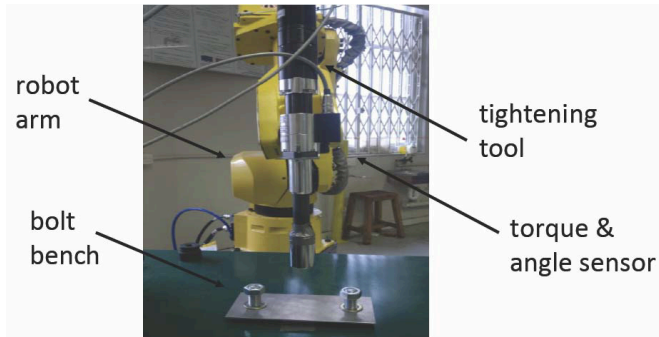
A bolt-tightening tool mounted on a robot arm.
